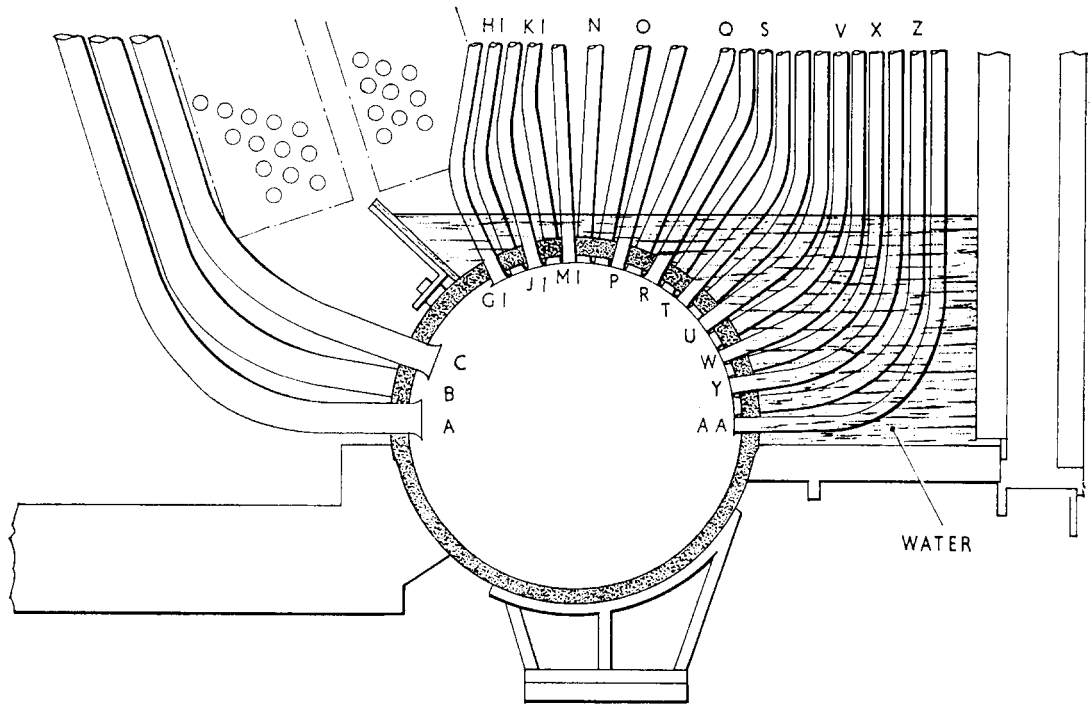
SECTIONAL ELEVATION IN WAY OF STEAM WATER DRUM
